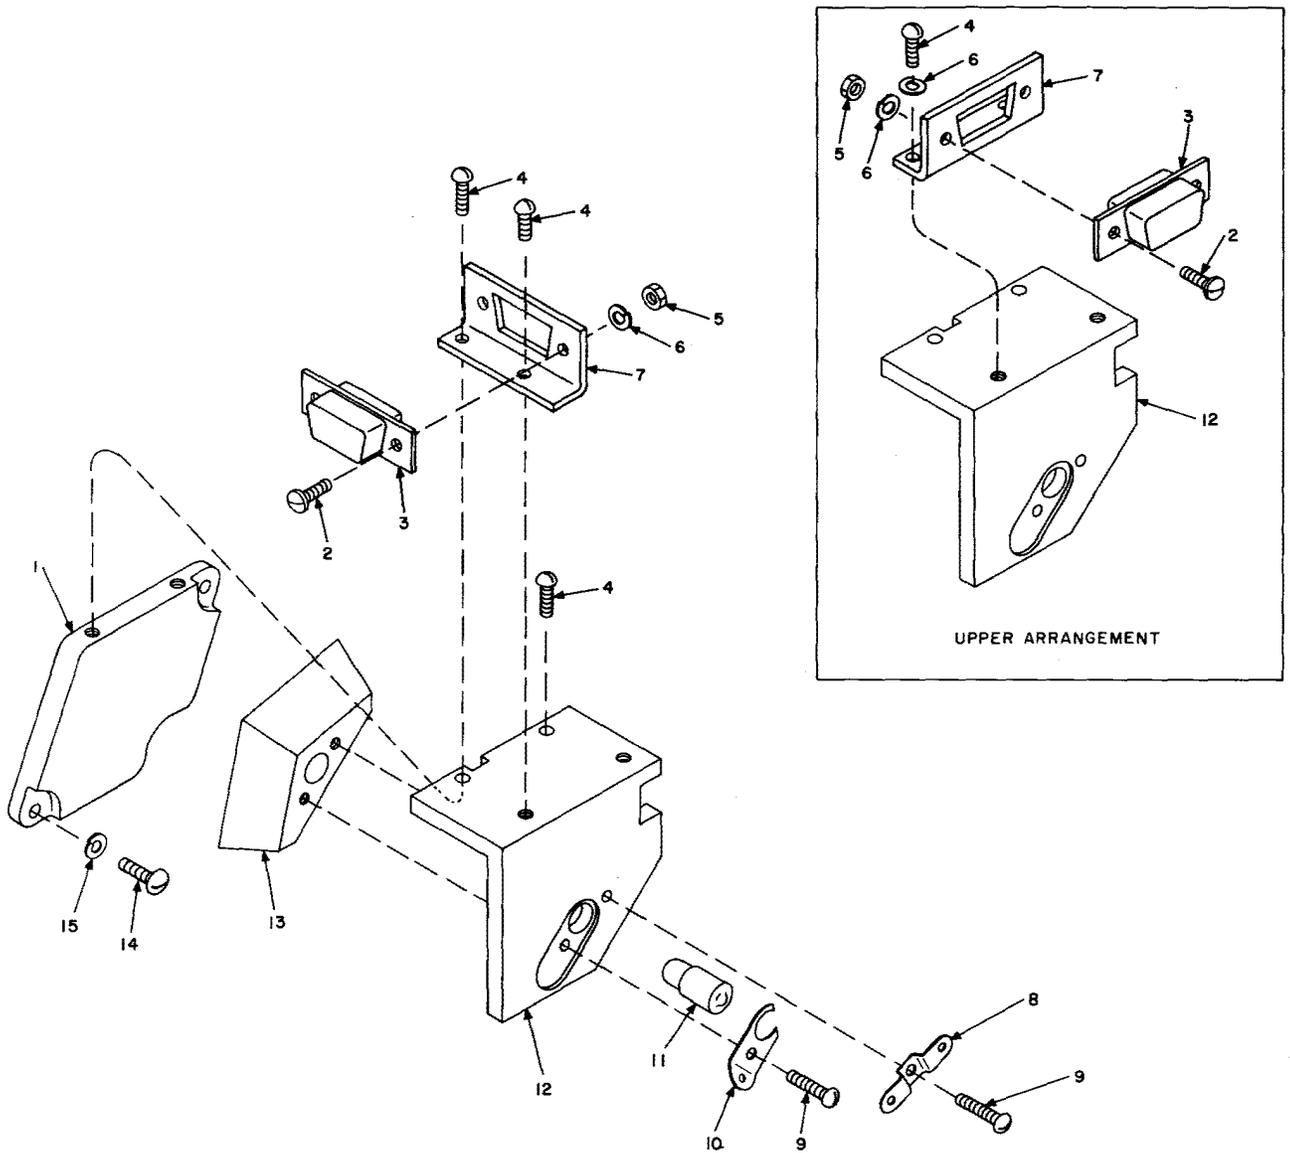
Printed Circuit Board Chassis L-502590 and Printed Circuit Board Assemblies
